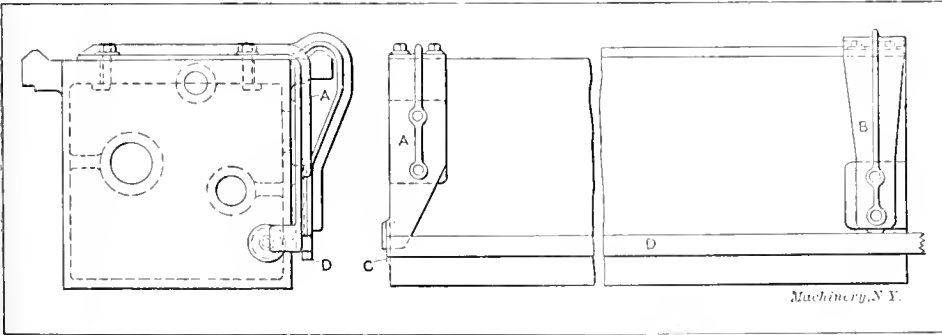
Jig used for Drilling Lead-screw Box Bolt Holes in the Bed
